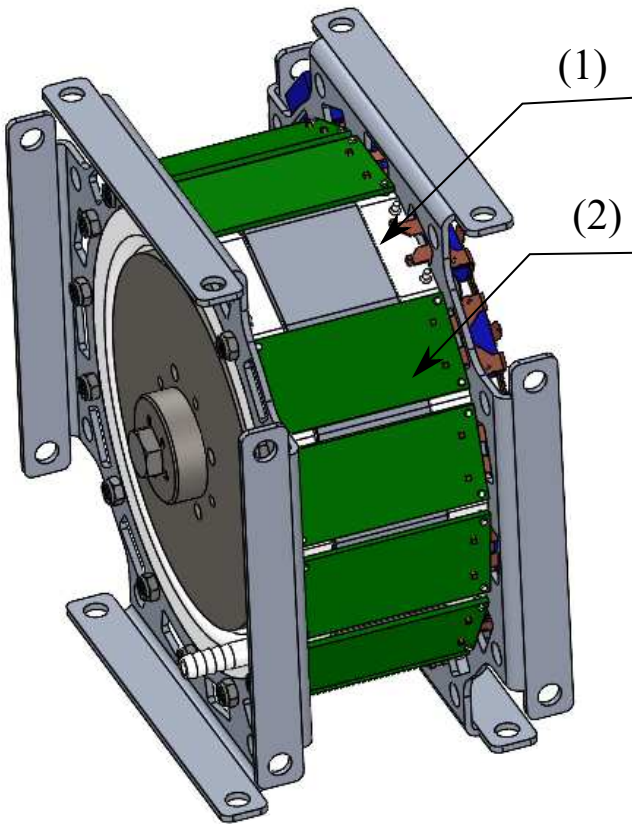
The CP integrated YASA machine with the converter PCB on top: (1) The polygon shared cooling structure, (2) Converter module PCB.
